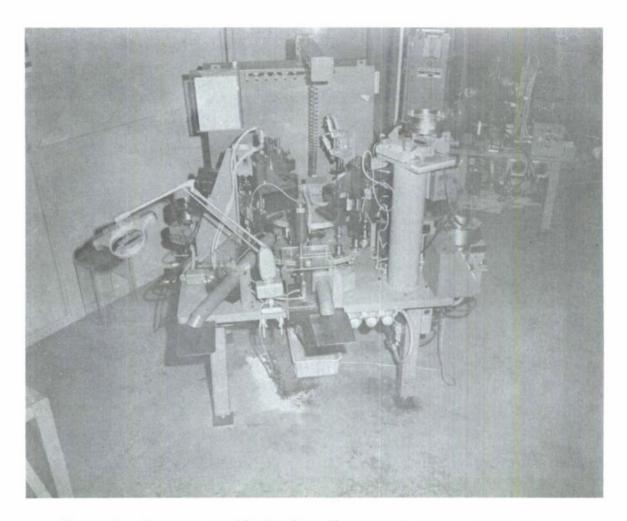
Verge Assembly Machine (foregound), Pinion Assembly Machine (background)
